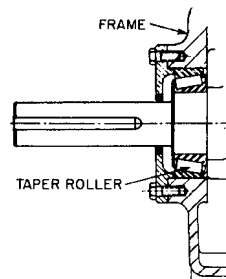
The main bearing mounted directly in the frame (Flowsolve Corporation)
